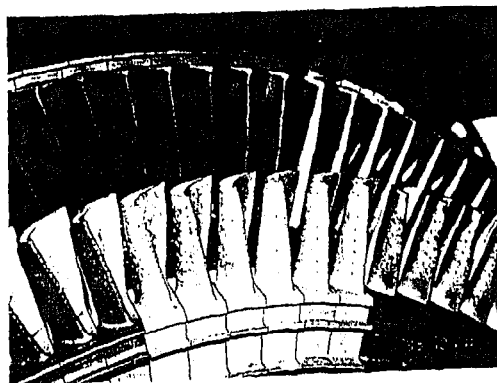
Directionally solidified (DS) and single-crystal (SC) alloy moving blades installed in turbine rotor
